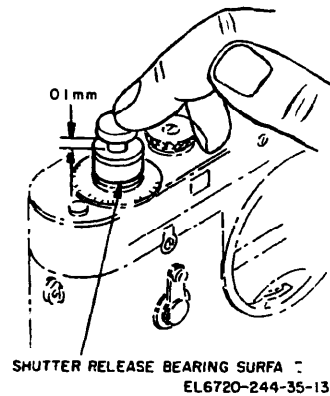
Gauge with center shaft 42-253.01-Z1L74.
